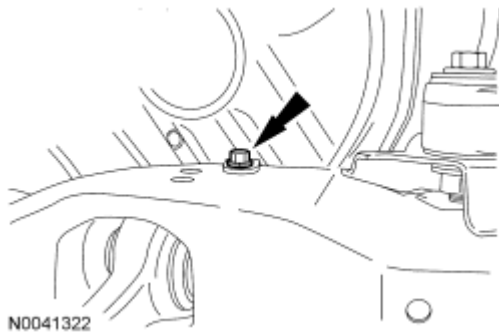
Locating Subframe Support Brackets And Bolts
